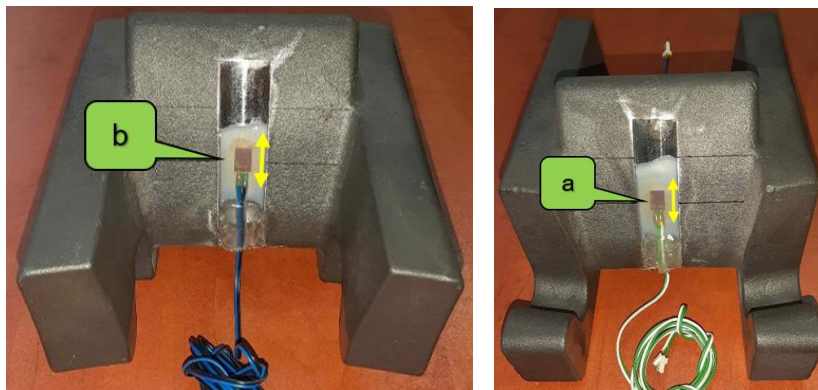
Toothed segment with two strain gauges glued on it (one on each tooth flank)
